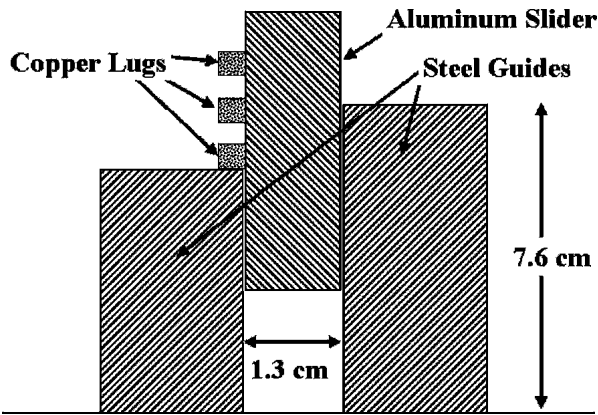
Schematic of the shear test fixture using military specifications MIL-J-24445A
